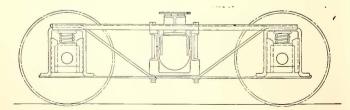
HIGH-SPEED DESIGN HAVING SPRINGS OVER BOXES INSTEAD OF EQUALIZER BARS
